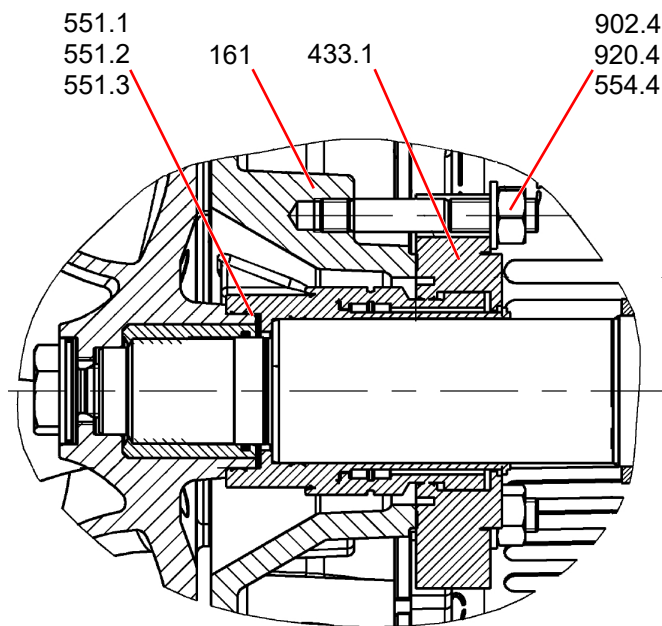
ANDRITZ – Cartridge seal BS24 – BS32
